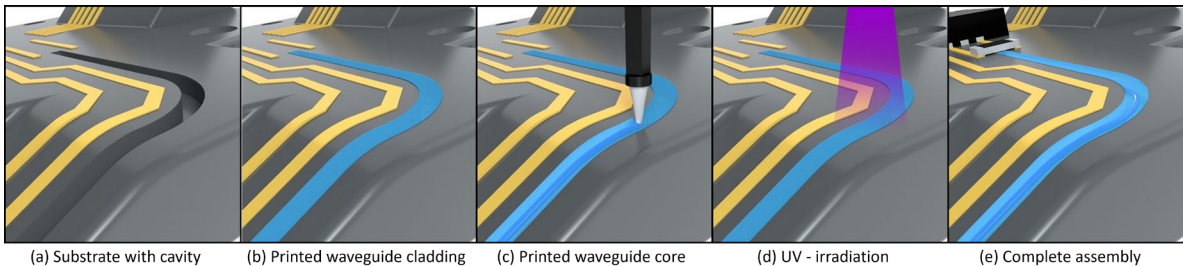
Mosquito method process chain (a) substrate with cavity; (b) printed waveguide cladding; (c) printing of waveguide core; (d) UV irradiation; (e) complete waveguide with assembly
